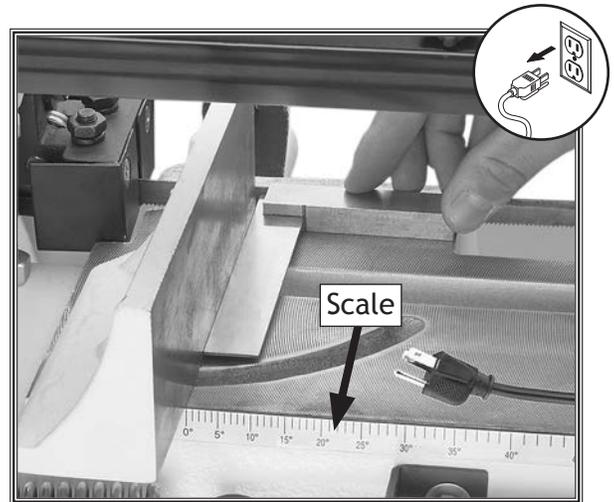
Using a machinist's square to adjust the vise perpendicular to the blade.
